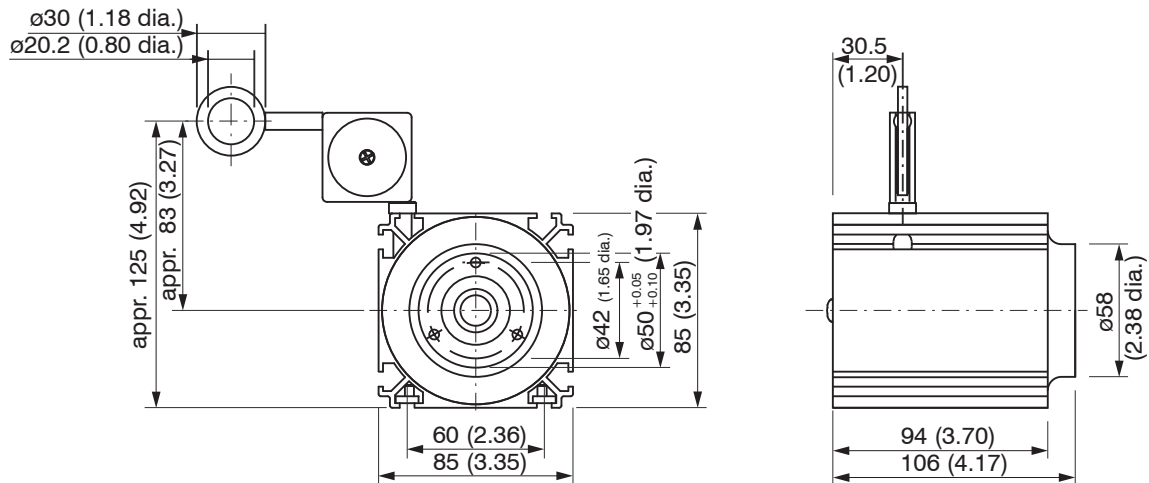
Option WDS-TR, guide pulley mounted on the sensor, dimensions in mm (inches), not to scale
